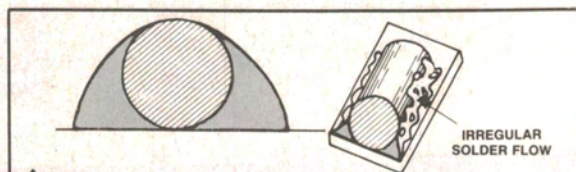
When poor wetting occurs, the solder meets one surface at an abrupt angle and the solder flows irregularly.
